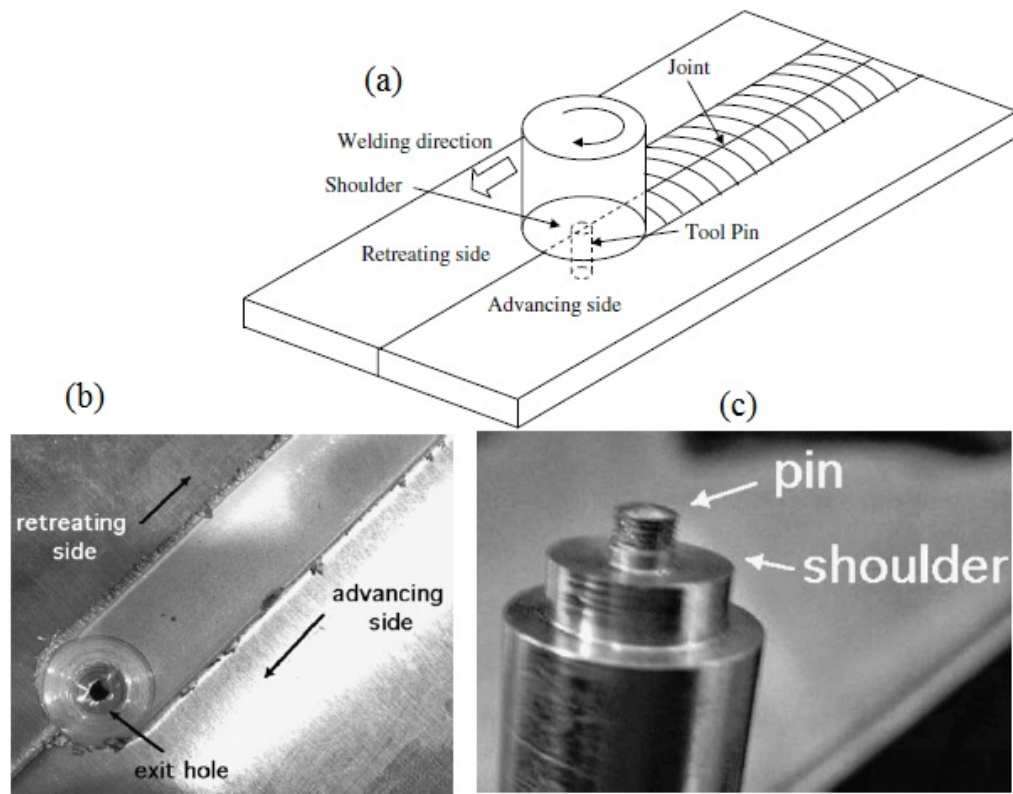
(a) Schematic Illustration of (FSW) Process; (b) FSW Welded Aluminium Sheets; (c) FSW Cylindrical Tool with a Threaded Pin (Nandan et al., 2008).
